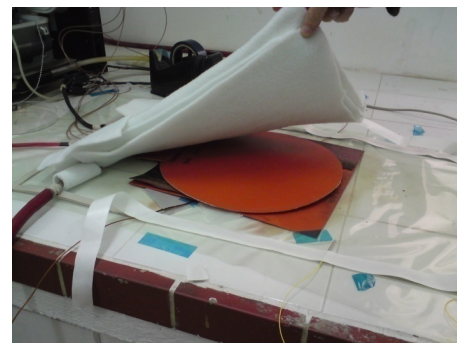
b: The orthogonal blanket bearing the dielectric sensors and thermocouples. Above it, the circular heating blanket, just one step before closing up of the vacuum bag.
